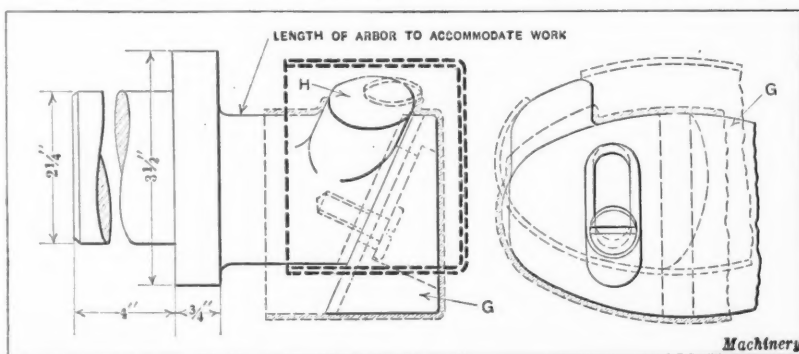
Arbor over which Flange surrounding Side Hole in Muffler Housing is drawn
